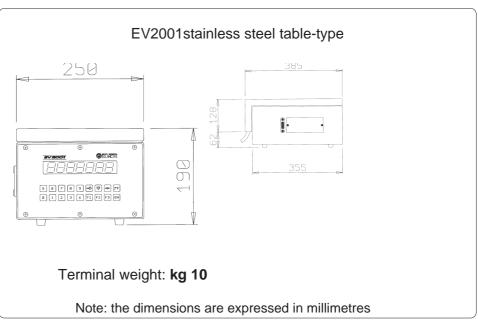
dimensions and weight of stainless steel table-type EV2001
